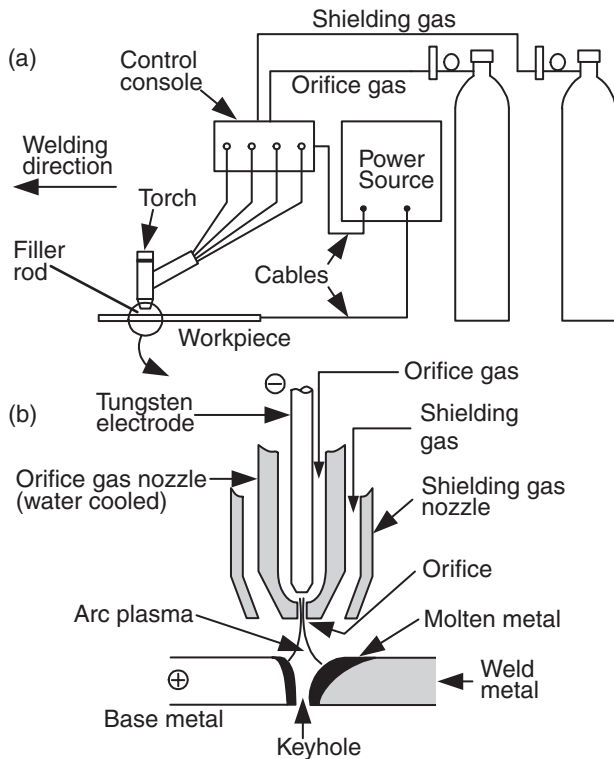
Plasma arc welding: (a) overall process; (b) welding area enlarged and shown with keyholing.
